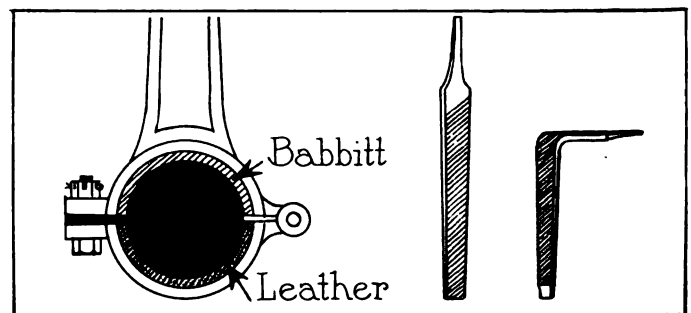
Connecting Rod Babbitt Replaced by Leather Packing and Screw Driver for Heavy Work Made from Large File.
